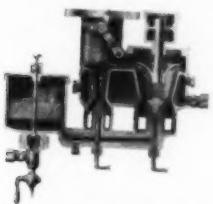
Willet Automatic Multiple Jet Carbureter.
